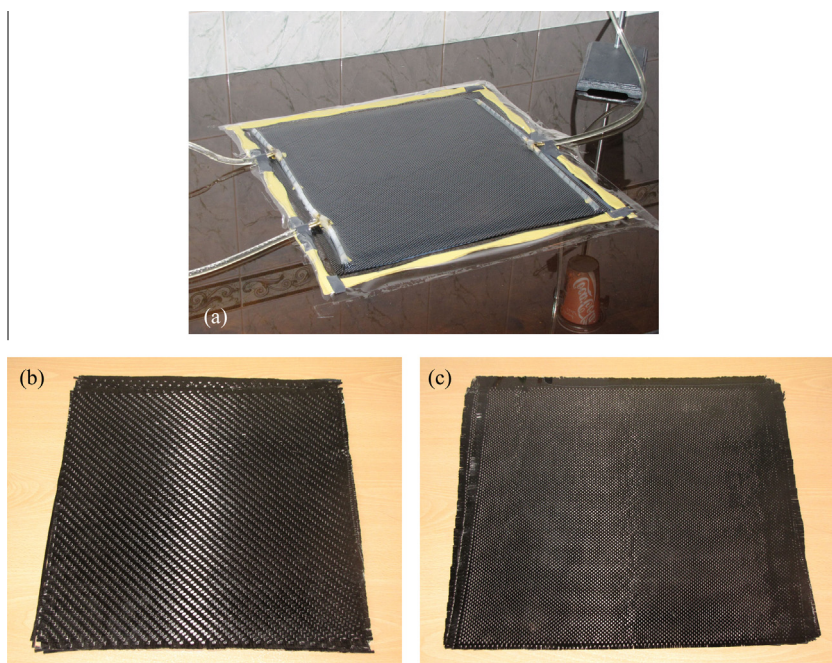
Photographs of (a) vacuum infusion processing of a laminate, (b) 12 K twill weave laminate, (c) 3 K plain weave laminate.
